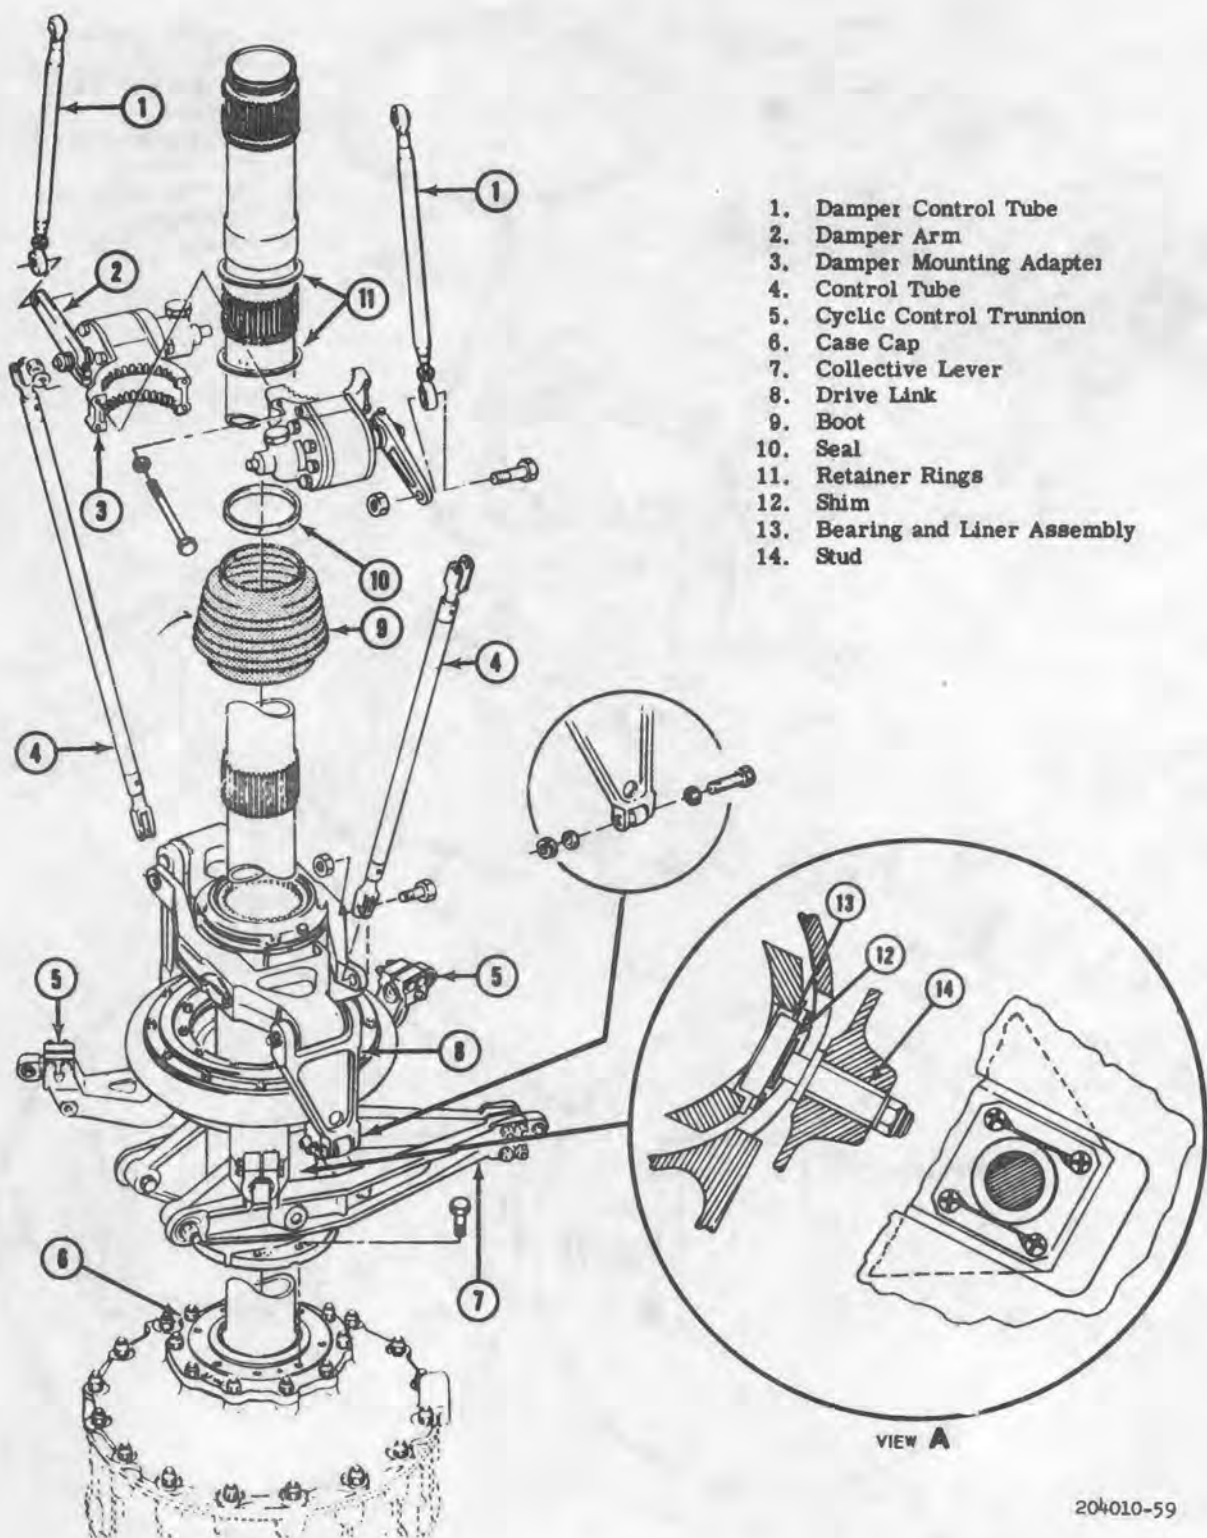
Stabilizer damper and adapter assembly (UH-1B serial No. 60-3546 thru 64-14100)
